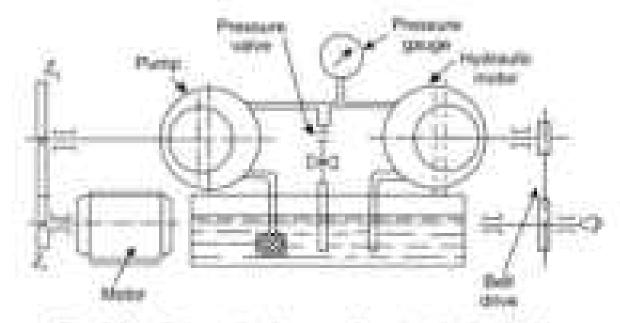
Schematic diagram of a rotary hydraulic drive
